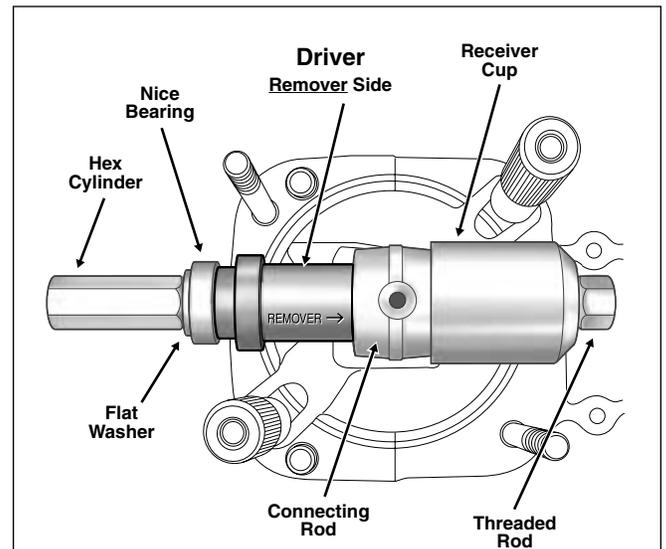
Connecting Rod Bushing Remover/Installer (Part No. HD-95970-32D)
